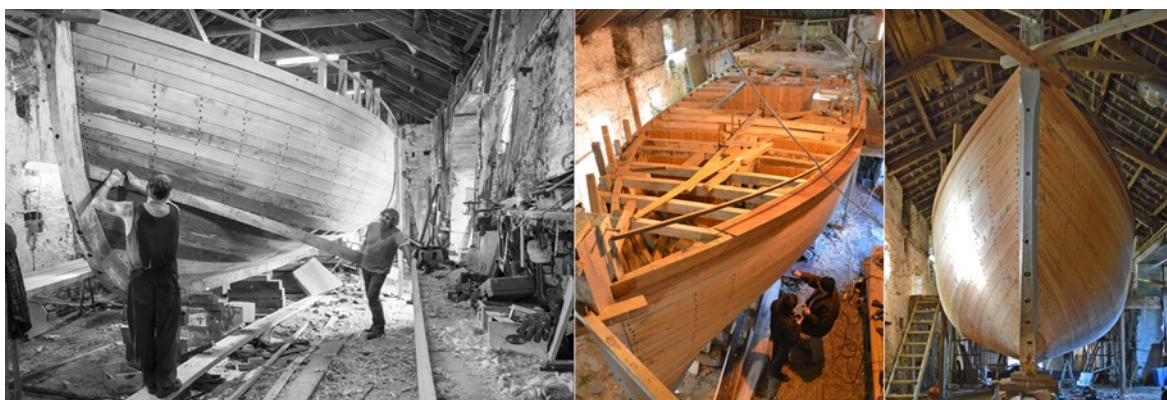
Rebuilding of the AK Ilan, ‘the last of Ireland’s timber built ocean going sailing ships’ (Image: www.ilan.ie)
